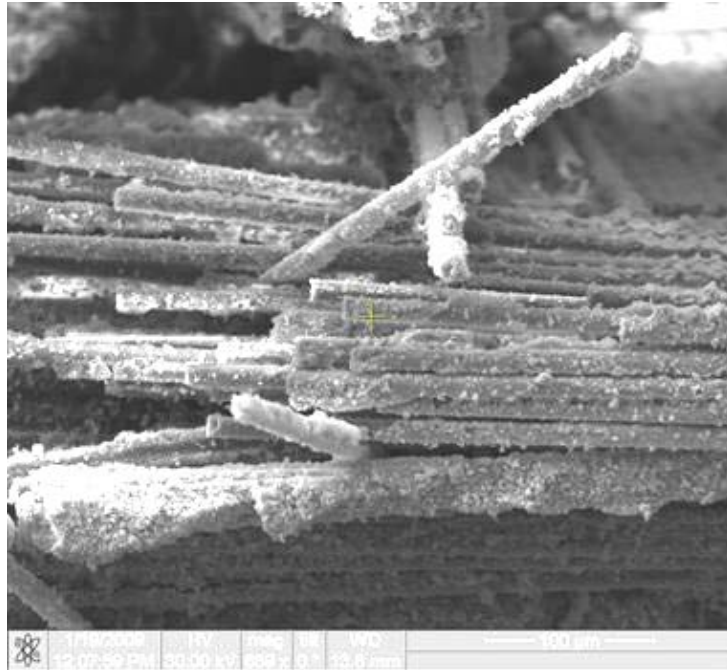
Fracture surface of the N720/AM specimen tested in tension to failure at 1100°C in laboratory air
